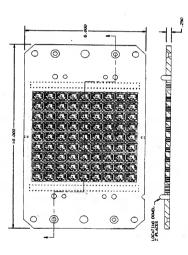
Typical multipurpose boat design for ceramic BGA packages. The boat is used for the low volume method of die attach, lid seal and ball attach.
